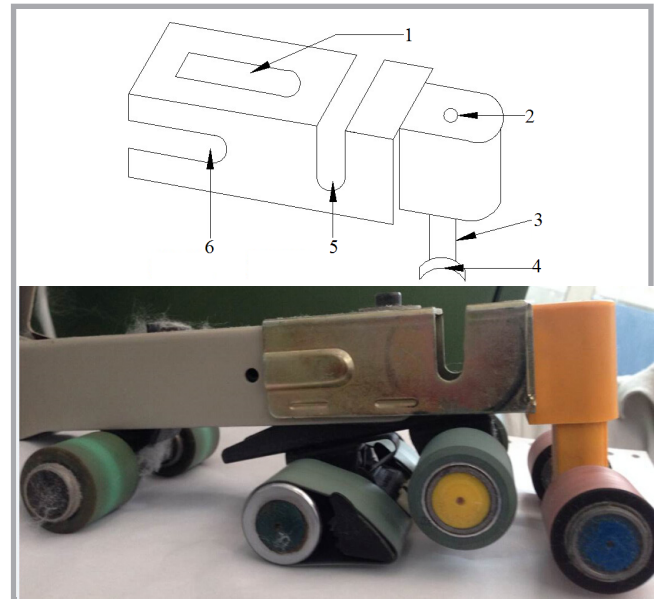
New block top roller retaining bar; a) Structure of block top roller retaining bar, b) Installation of block top roller retaining bar. 1. Fixing hole. 2. Regulation hole. 3. Gripping arm. 4. Gripping port, 5. Roller port, 6. Slot.
